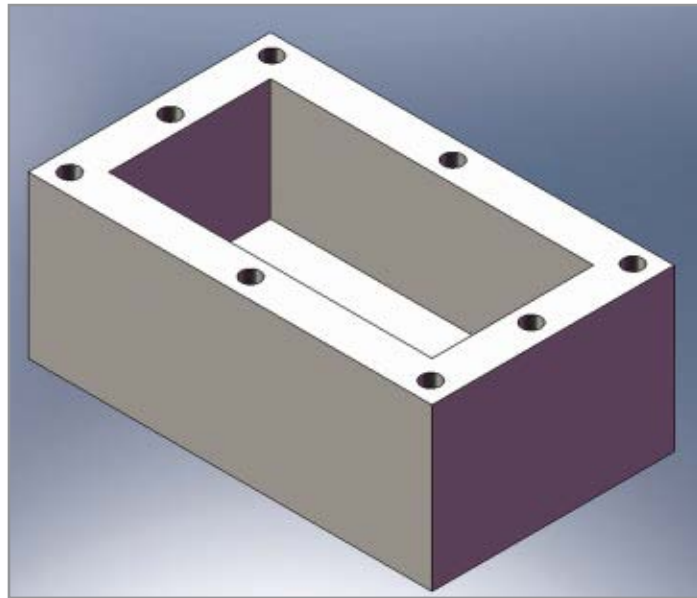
This type of part is a perfect example of when to make a hole template using a thin piece of Lexan.
